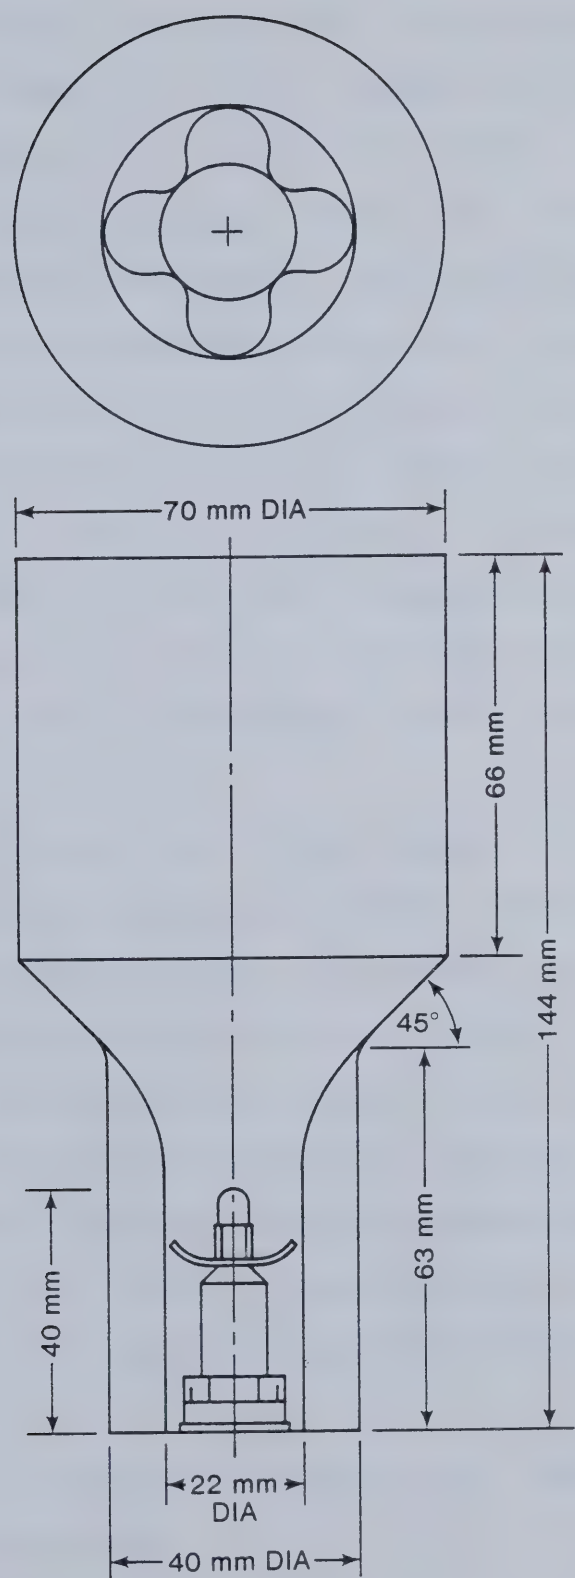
Cross-Sectional View of the Inner Portion of the Blending Container
